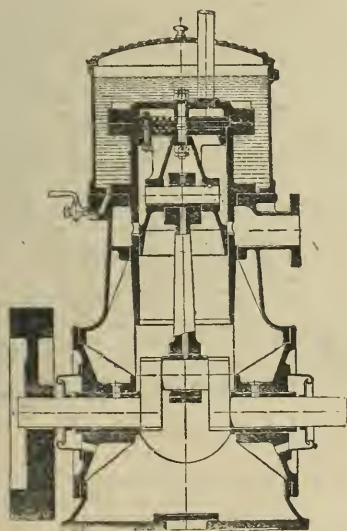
SECTIONAL VIEW OF SCOTT COMPRESSOR.
